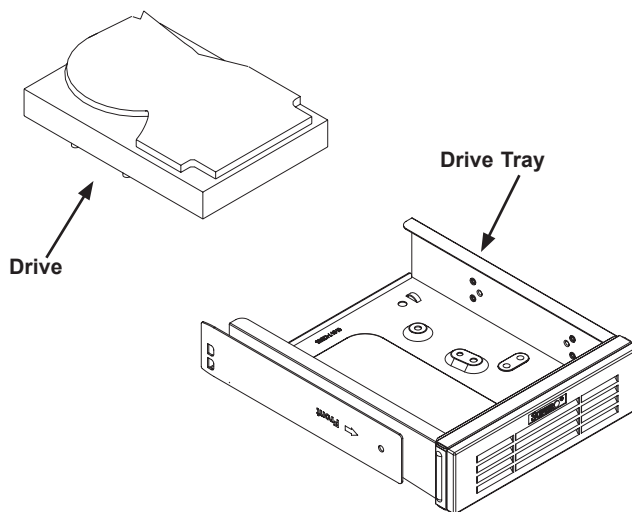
Installing a 3.5" Drive to the Drive Tray
